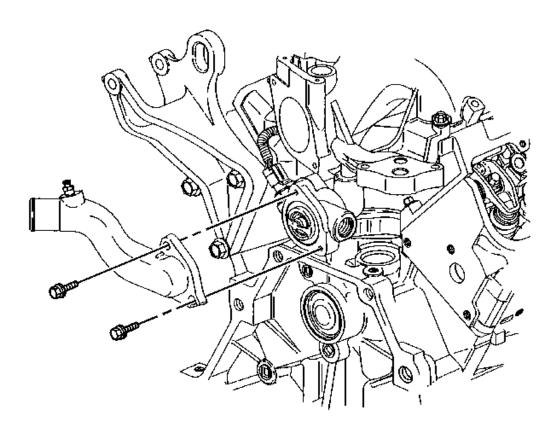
Removing ECT Sensor Courtesy of GENERAL MOTORS CORP.
